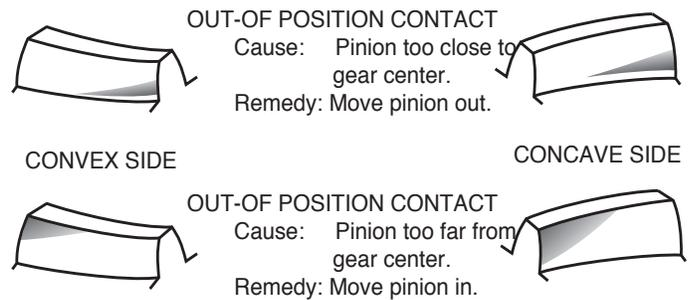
Tooth Contact Pattern—Correct and Incorrect
